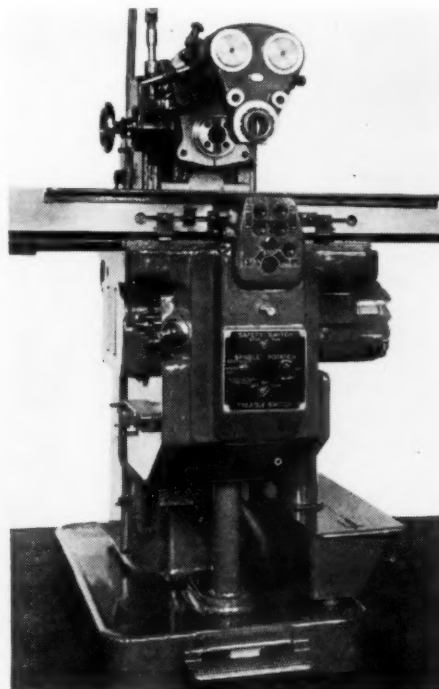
SETUP SWITCHES ON A KNEE-TYPE MILLING MACHINE
